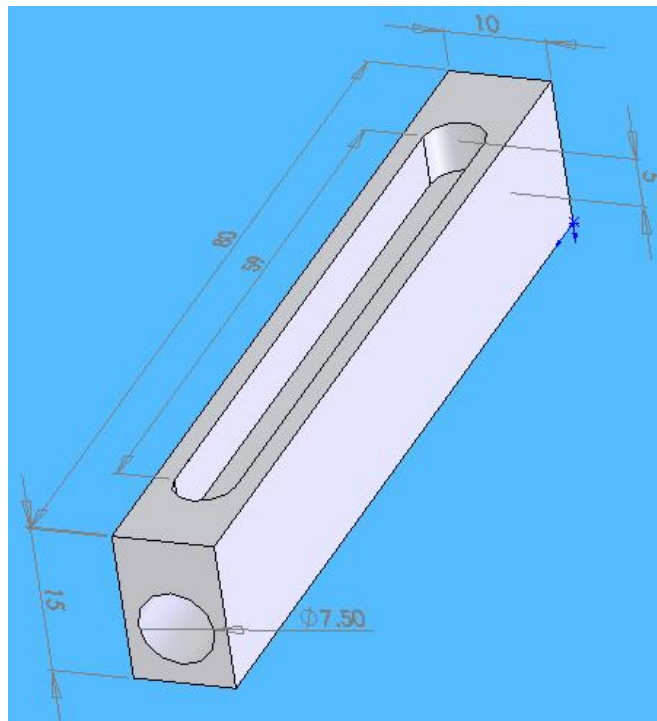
The third step in header fabrication: cutting a slot to insert the extruded aluminum section into
